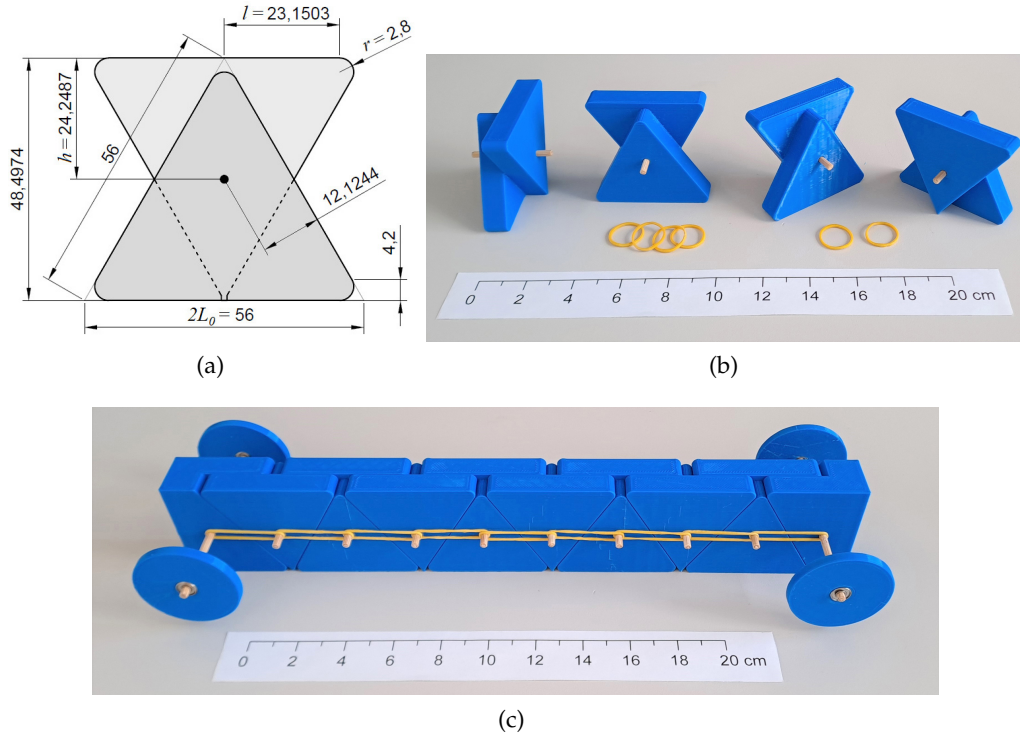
Details of the segments and their assembly in a beam. (a) Construction drawing of one segment with indication of main dimensions [mm]; (b) view of the 3D-printed segments and the (yellow) rubber bands; (c) assembled simply-supported beam composed by 10 segments, with end wheels to simulate roller constraints.
